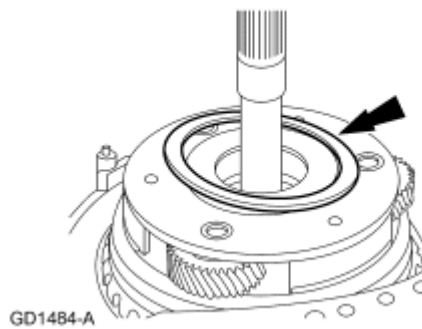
No. 9 Reverse/Overdrive Ring Gear Thrust Bearing
